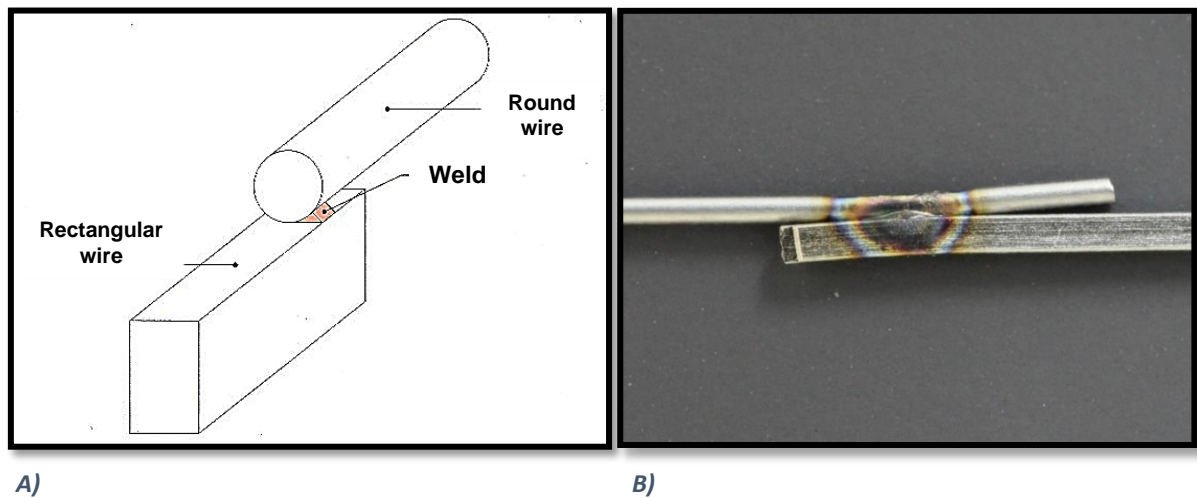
A) Schematics of the electric resistance weld. B) Image of a weld analyzed by this report.
